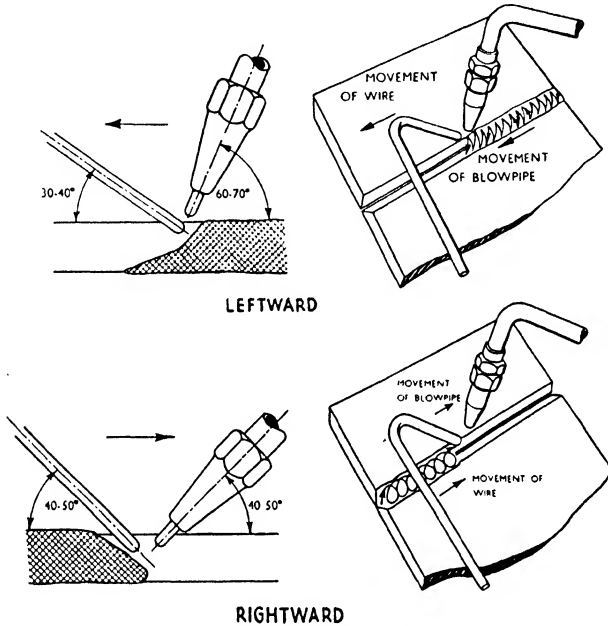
LEFTWARD AND RIGHTWARD METHODS OF WELDING
